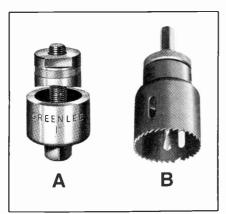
The chassis punch (A) makes cleaner holes but acess cannot always be obtained from beneath the surface. The hole saw (B) is ideal for the penetration of wood as employed on many motor homes. Courtesy Of Greenlee Tool Co., Division of Ex-Cell-O Corp.
